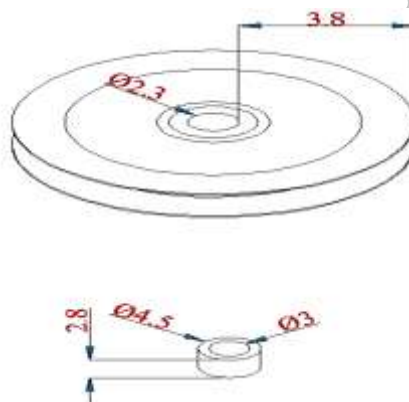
schematic diagram of abrasive brush with dimension of filler bush
